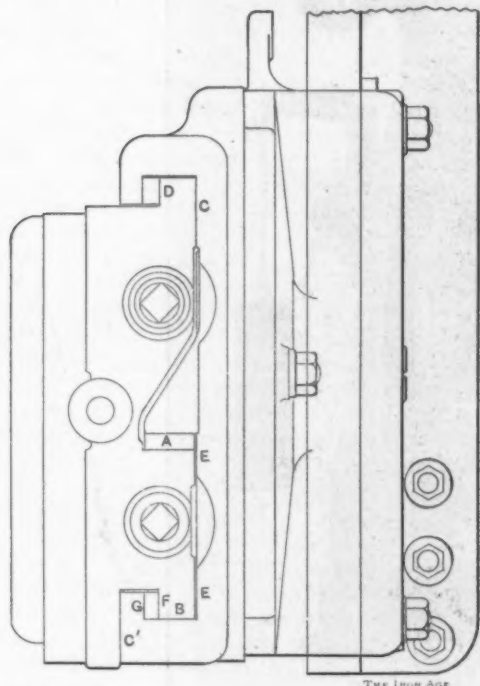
Left End View of Cross Rail.—Swivel Head and Slide.
